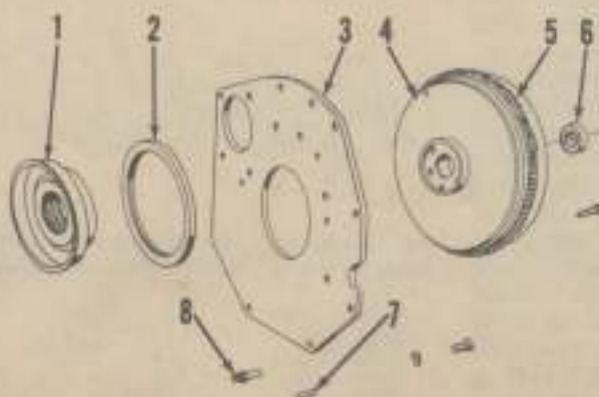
Exploded view of D-17 diesel rear oil seal, plate and flywheel. Two-piece rear oil seal used on earlier production is serviced by one-piece seal (1) shown. D-15 diesel models are similar.
